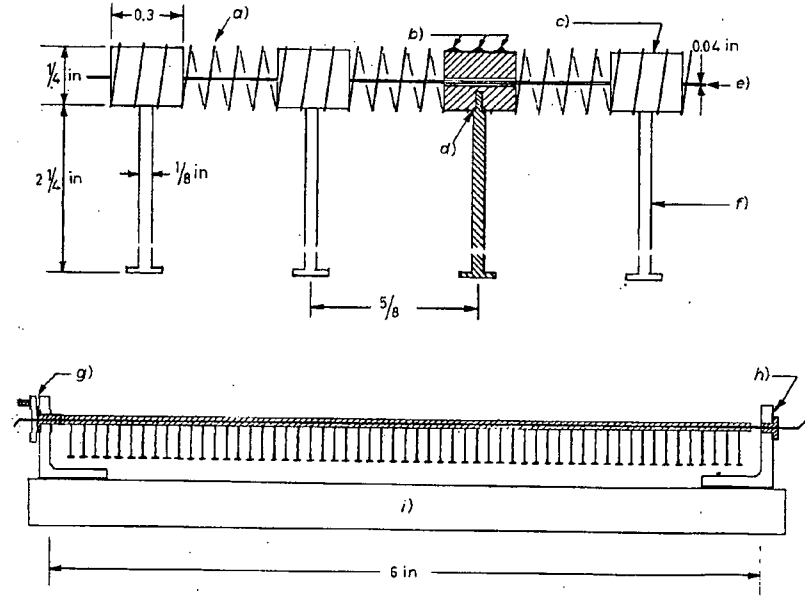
Mechanical model of the SGE: a) spring 0.2 diameter, b) solder, c) brass, d) tap and thread, e) piano wire, f) nail, g) and h) ball bearings, i) wooden base.
